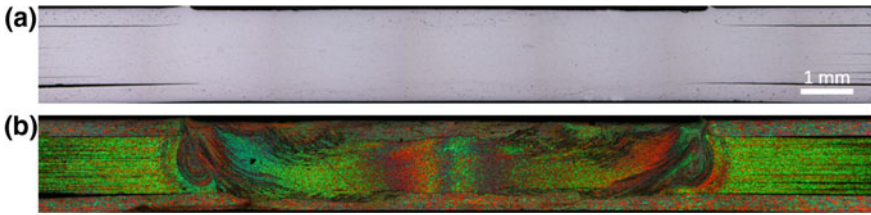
A representative macrograph of dissimilar 80 foils and 2 thin sheets Al alloys welded by refill FSSW. Low magnification overview before (a) and after (b) etching process
